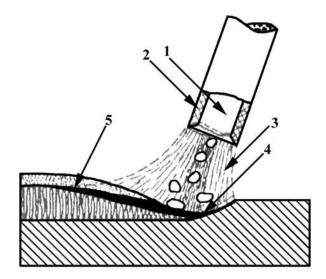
Space between electrode end and welded element in which metallurgical welding processes take place
